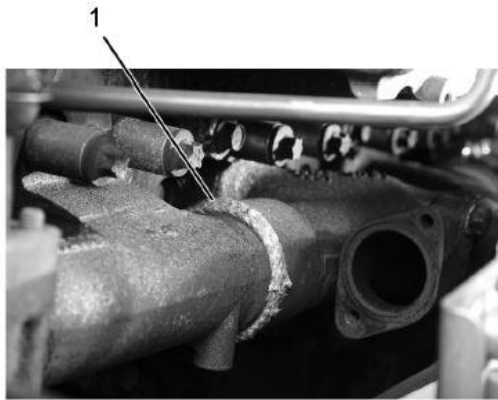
Rear Exhaust Manifold Ring Seal Packing
